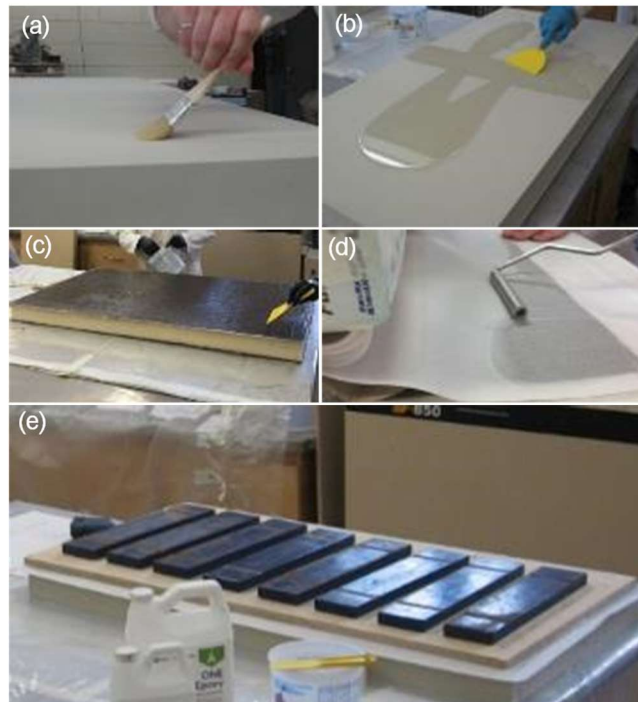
Specimen fabrication: (a) dust removal; (b) resin application on foam; (c) resin application on flax fabric layer; (d) consolidation; and (e) curing.
